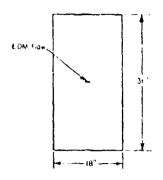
SHEET FRACTURE TOUGH-NESS SPECIMEN
